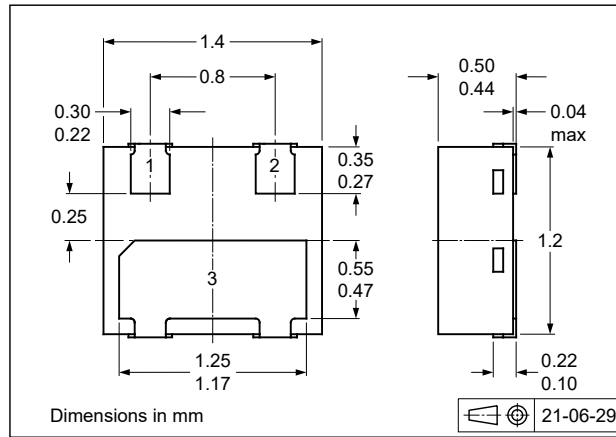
Package outline DFN1412D-3 (SOT8009)
